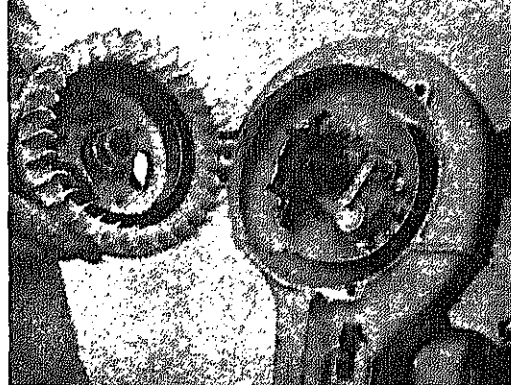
When the flywheel is removed, the stator, with ignition coil and contact breaker, becomes visible
